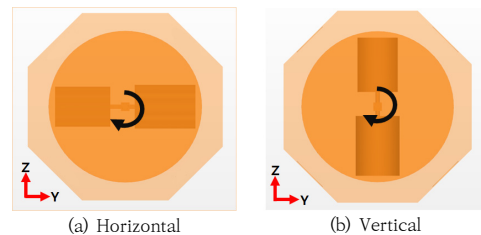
Molding machine analysis model geometry (a) Horizontal (b) Vertical
